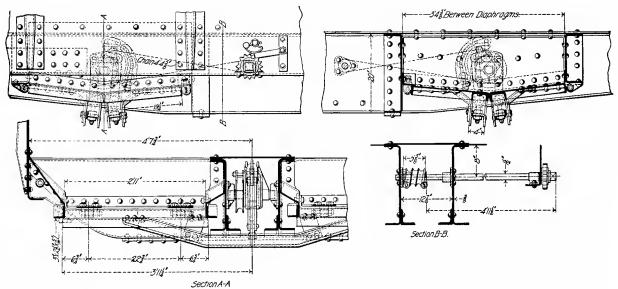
Lind Drop Door Apparatus for All-Steel Hopper Bottom Gondola Car. Pressed Steel Car Company.
